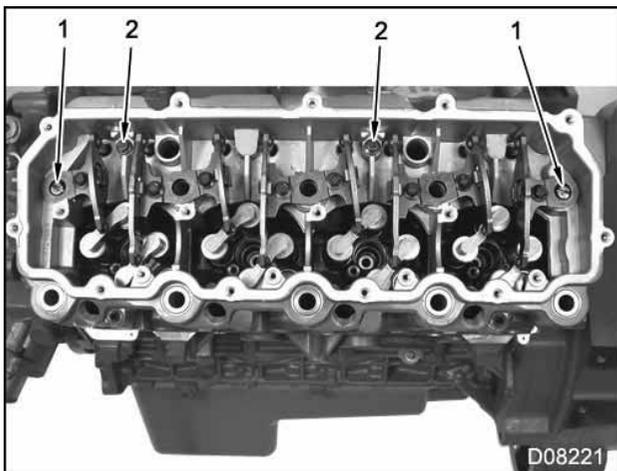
2006 Model Year (two M10 mounting bolts for rocker arm carrier)
